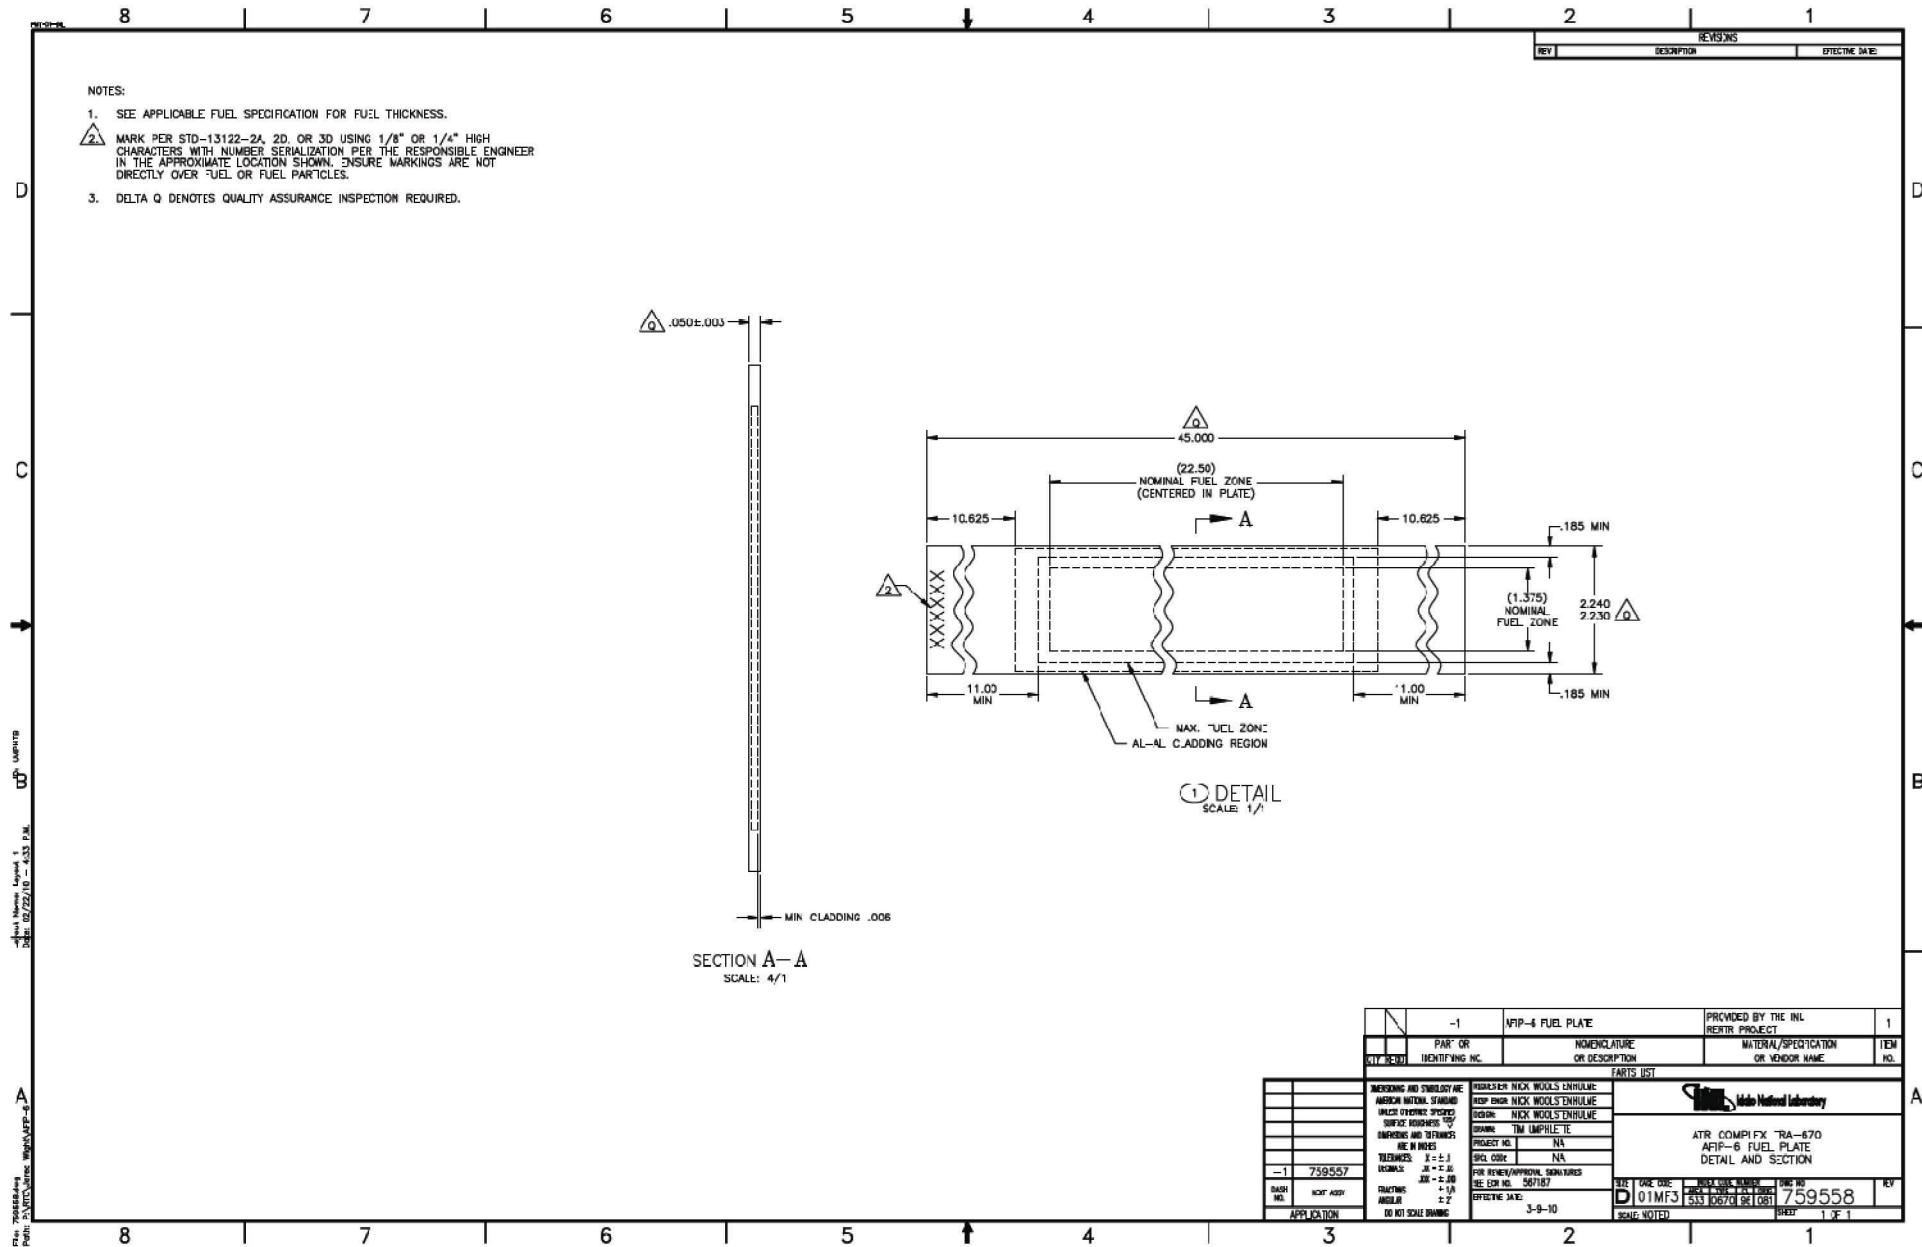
DWG-759558 REV 0 AFIP-6 Fuel Plate.
